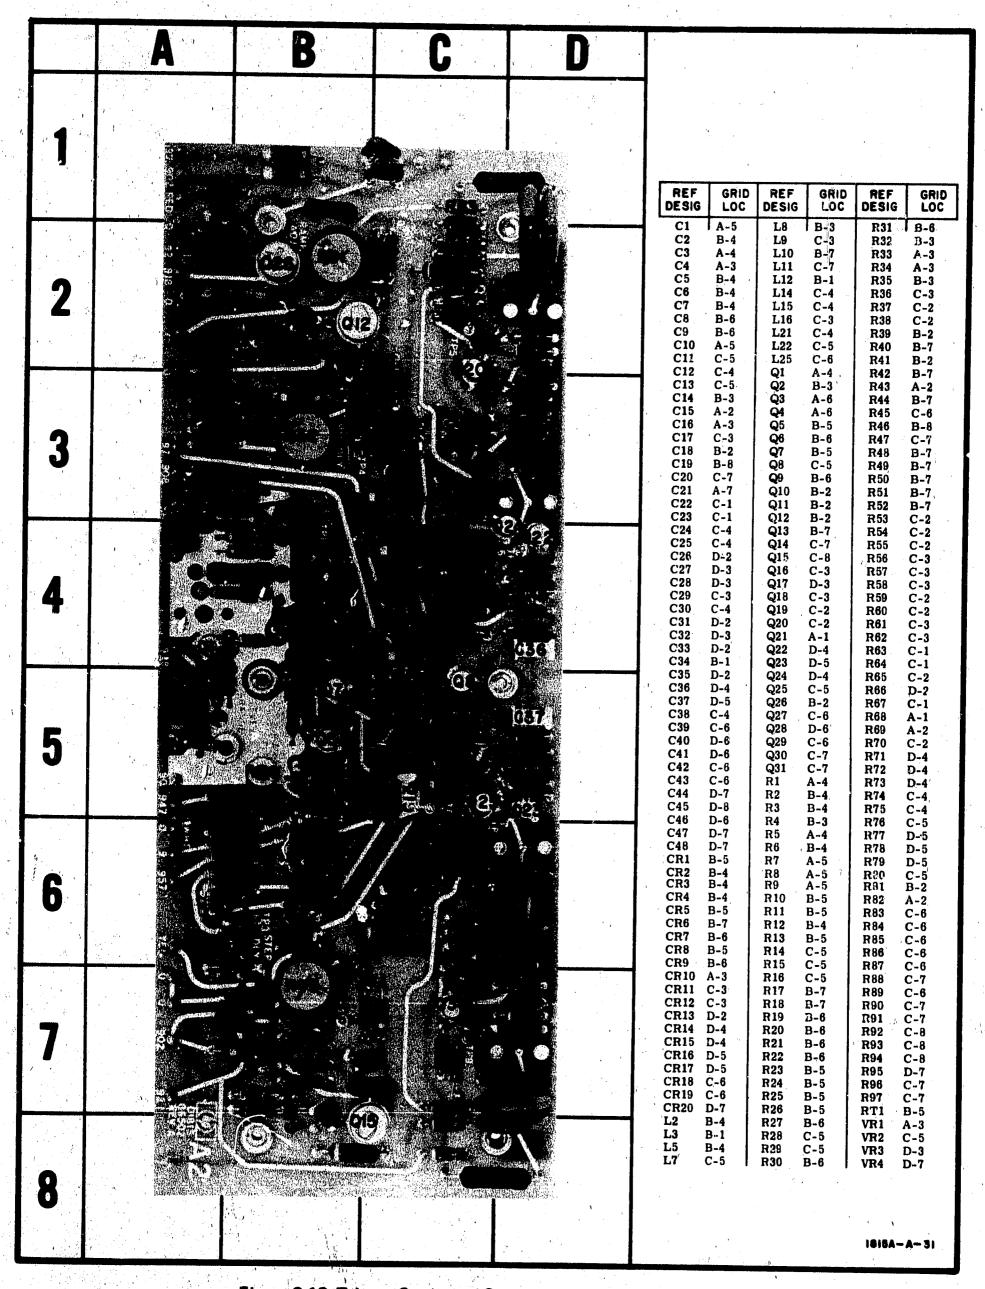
Trigger, Strobe and Step Assembly A2 Parts Locations
